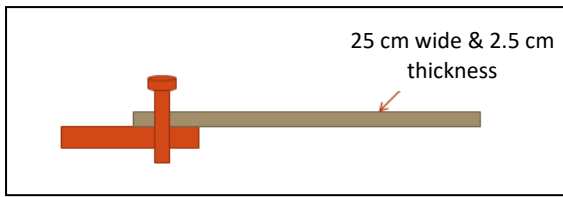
Bolt connection between Leg and Plate carrying Motor & Clutch arrangement
